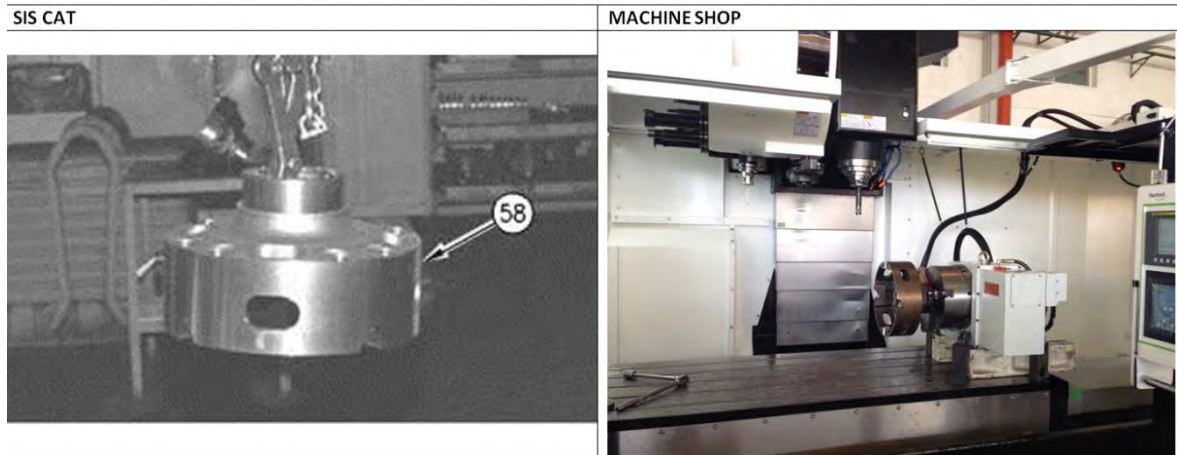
SISWEB Horizontal Lifting (assembly and disassembly) versus the vertical installation in the machining tool
